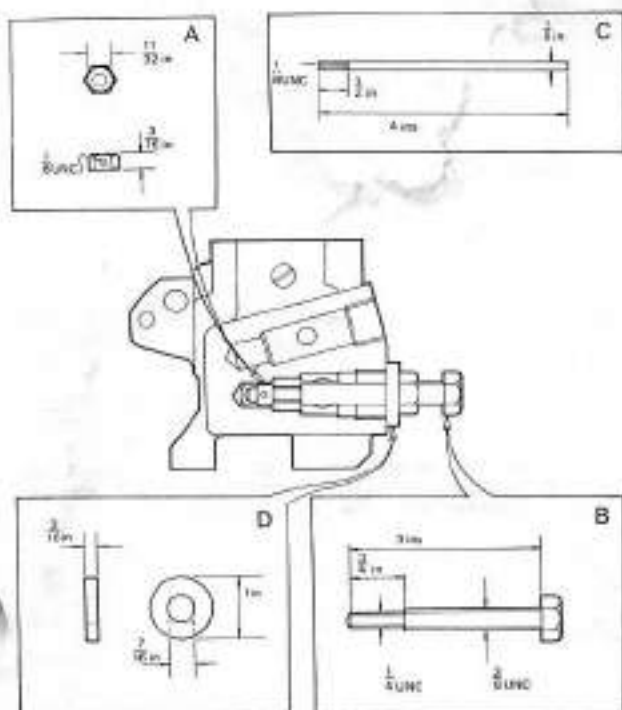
To renew non-return (check) valve seat, a tool can be fabricated to dimensions shown. Cross-sectional drawing of valve body in center view shows tool in position to remove valve seat. Pin (C) is used to position small nut (A) while puller bolt (B) is threaded into nut, then pin is unscrewed from nut. Hold bolt and turn outer (large) nut to remove seat.
